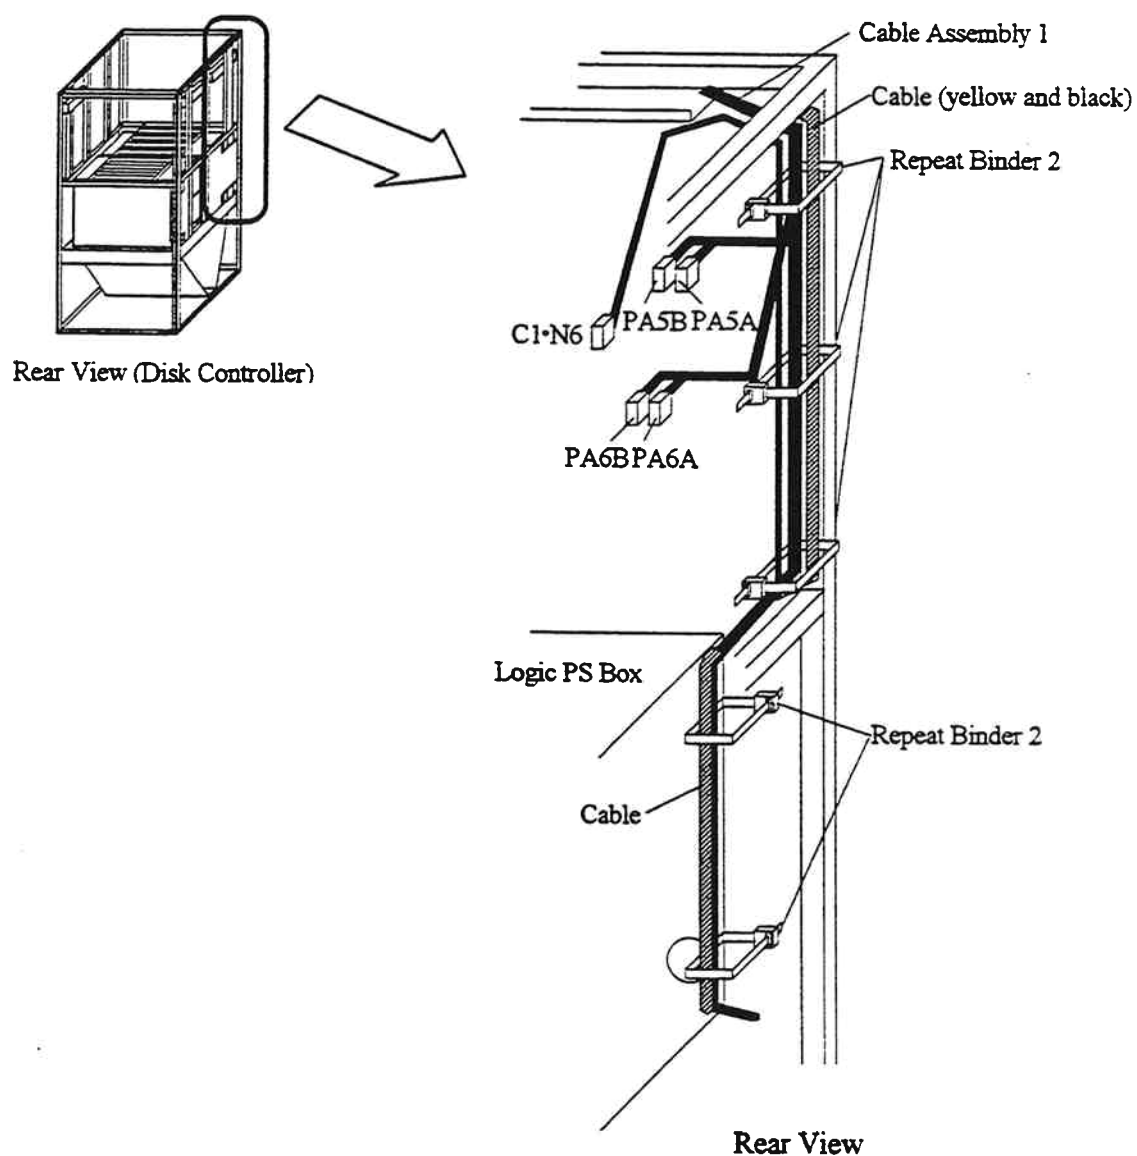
Removal of the Cable Assembly 1
